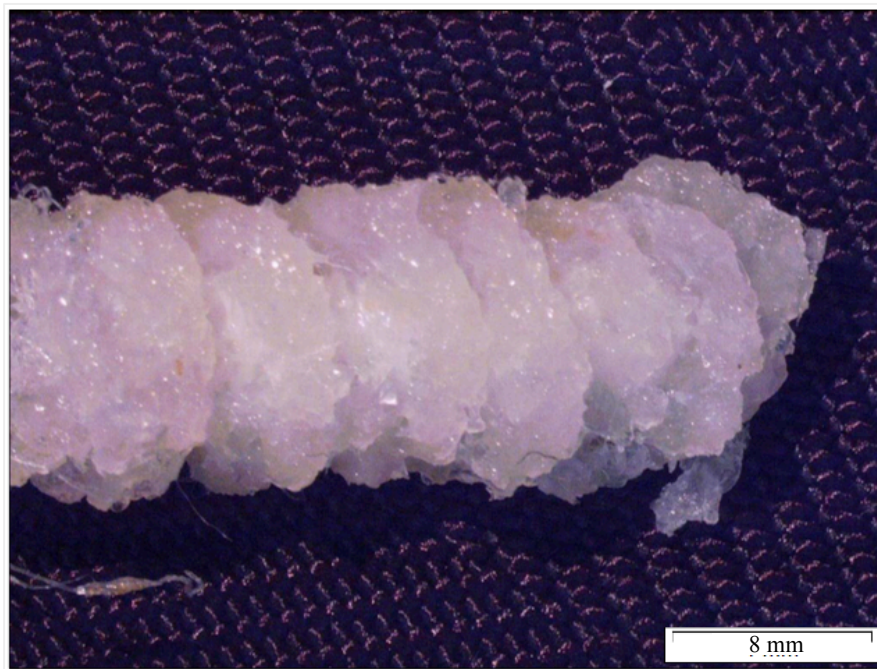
Constant heat makes the support material spread through the whole print in between layers affecting correct adhesion between layers.
